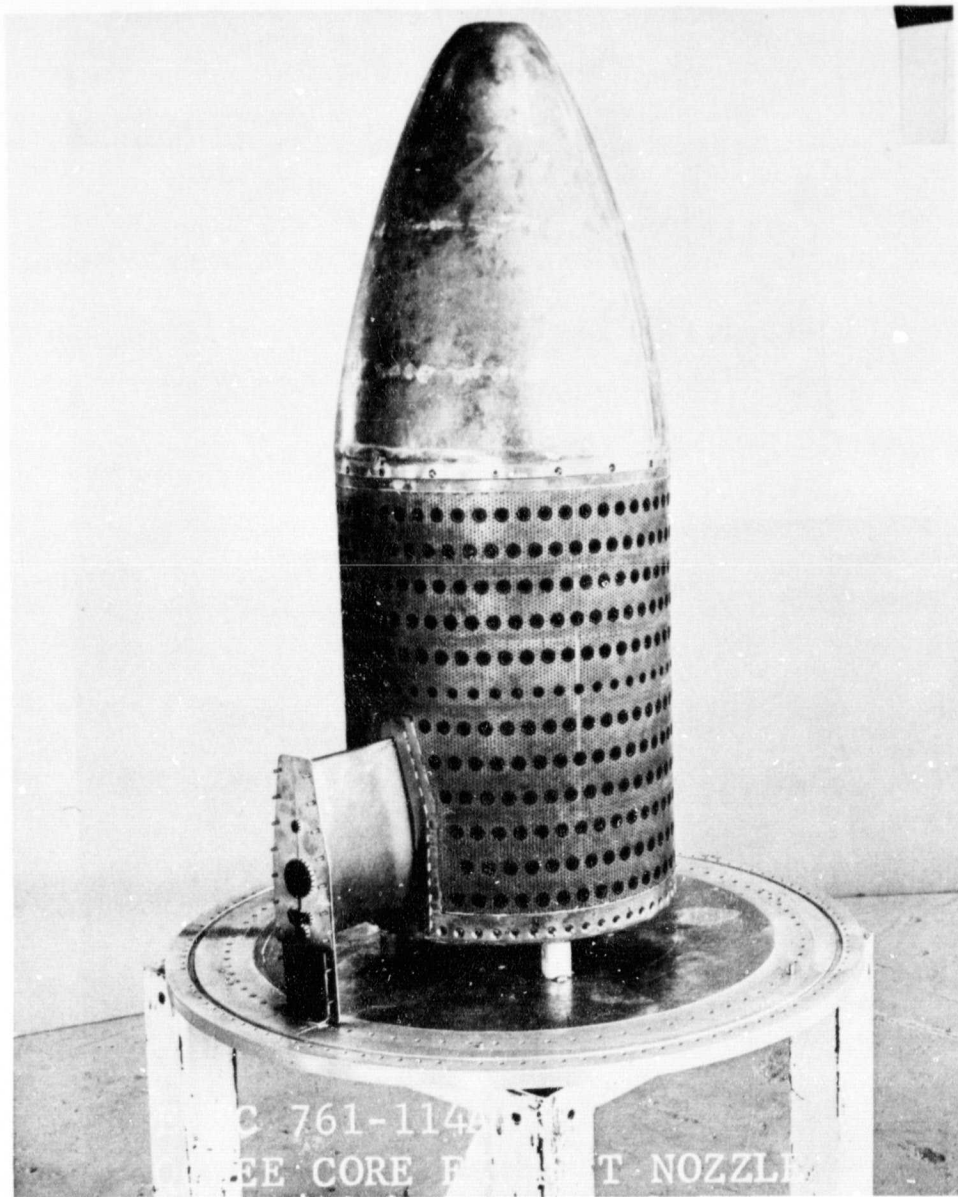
QCSEE Core Exhaust Plug Nozzle Assembly.
